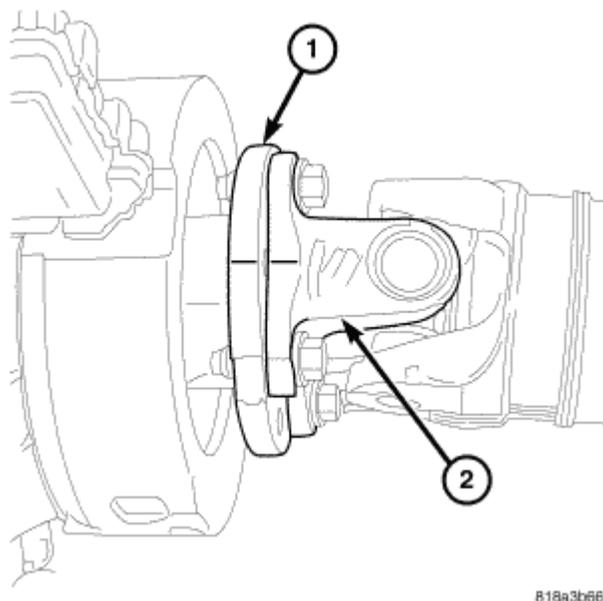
Identifying Line Across Transmission/Transfer Case Flange & Propeller Shaft Flange
